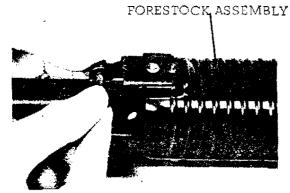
REMOVING THE FEED COVER AND FEED TRAY ASSEMBLIES
